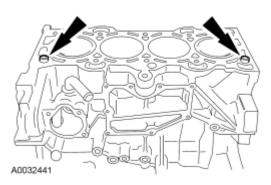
Identifying Cylinder Head Alignment Dowels Courtesy of FORD MOTOR CO.
